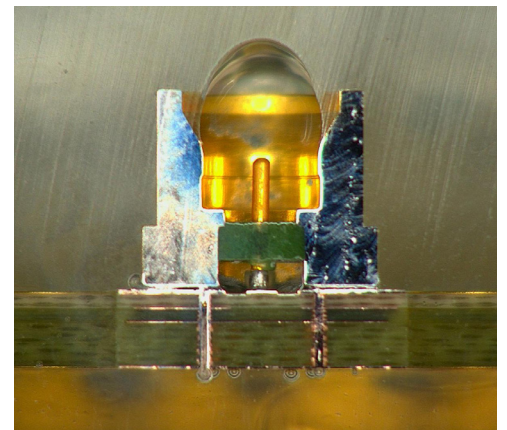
Cross-section of Glass Seal PCB Connector on board.
